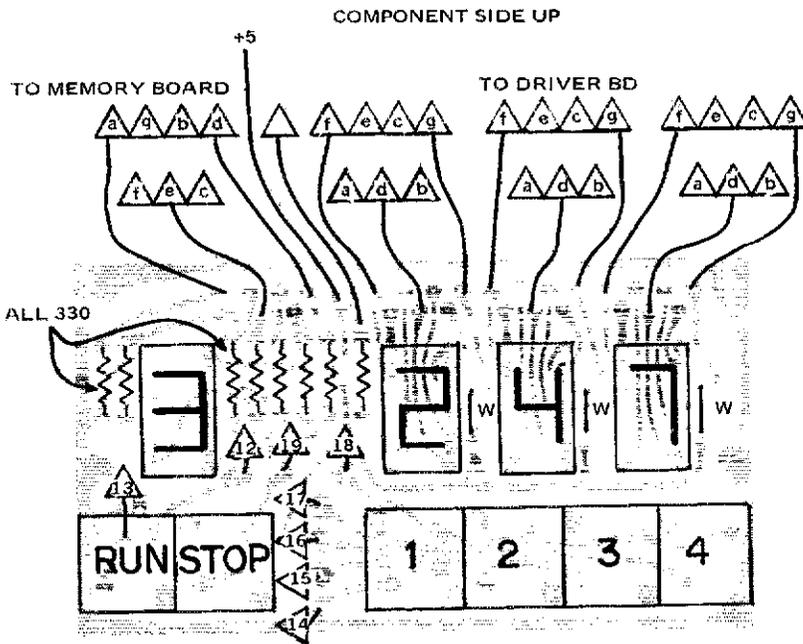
Etching pattern and component layout for readout board, shown from component side. W = wire jumpers. See Table I for wiring connections to other parts of the circuit.
